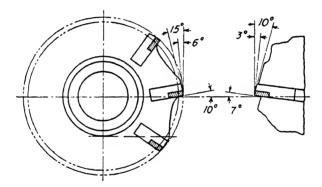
Milling cutter with negative rake to protect the cutting edge,
